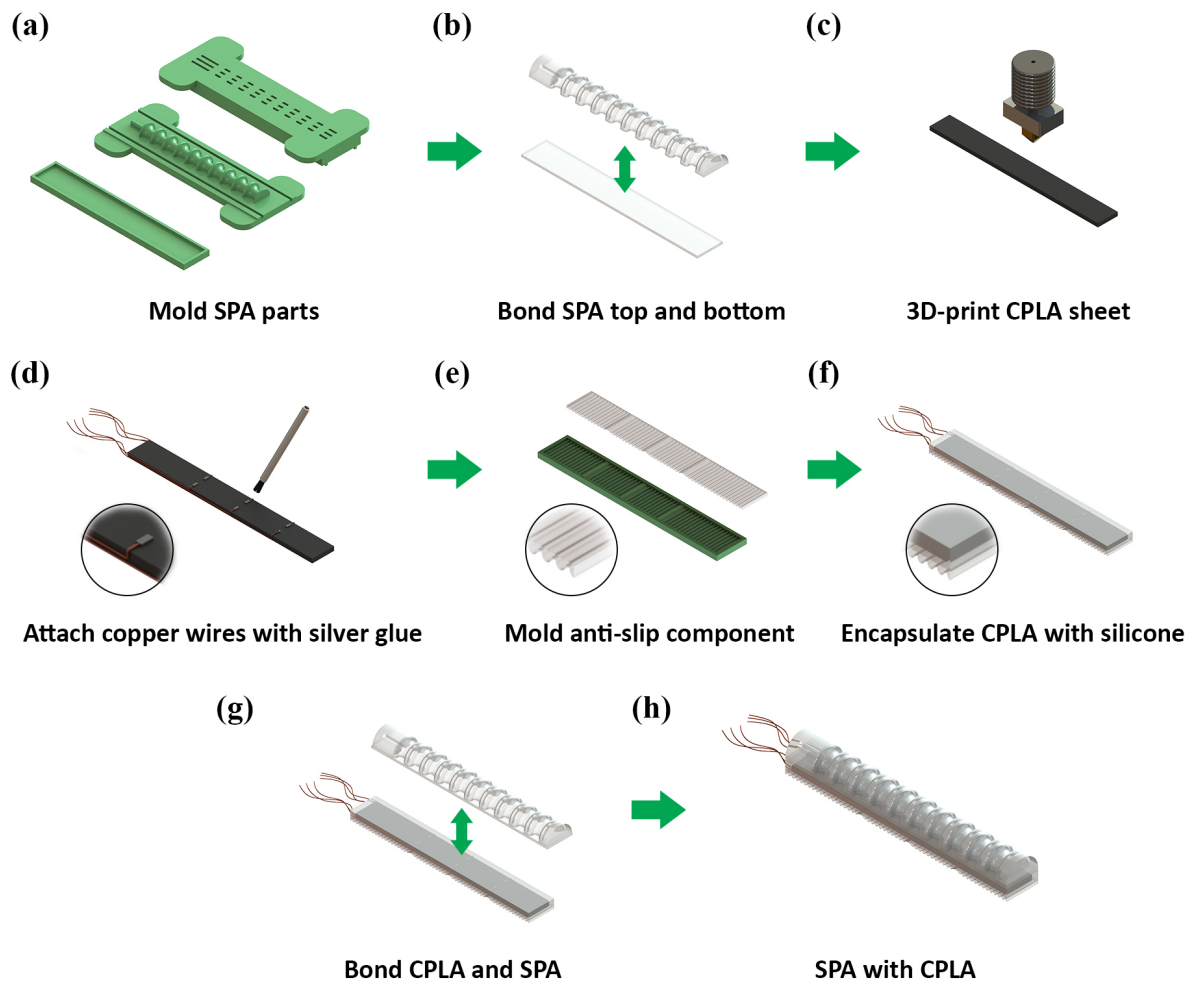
Fabrication of the SPA with a CPLA sheet integrated to its bottom layer. (a) 3D-printed mold parts for fabricating the SPA components; (b) Following curing, the upper and bottom parts of the SPA are bonded together; (c) The CPLA is 3D-printed using an FDM 3D-printer; (d) Thin copper wires are glued to the CPLA using a silver paste; (e) An anti-slip feature to prevent slippage during grasping; (f) The CPLA is encapsulated with uncured silicone; (g) The SPA and the encapsulated CPLA are bonded to complete the fabrication.
